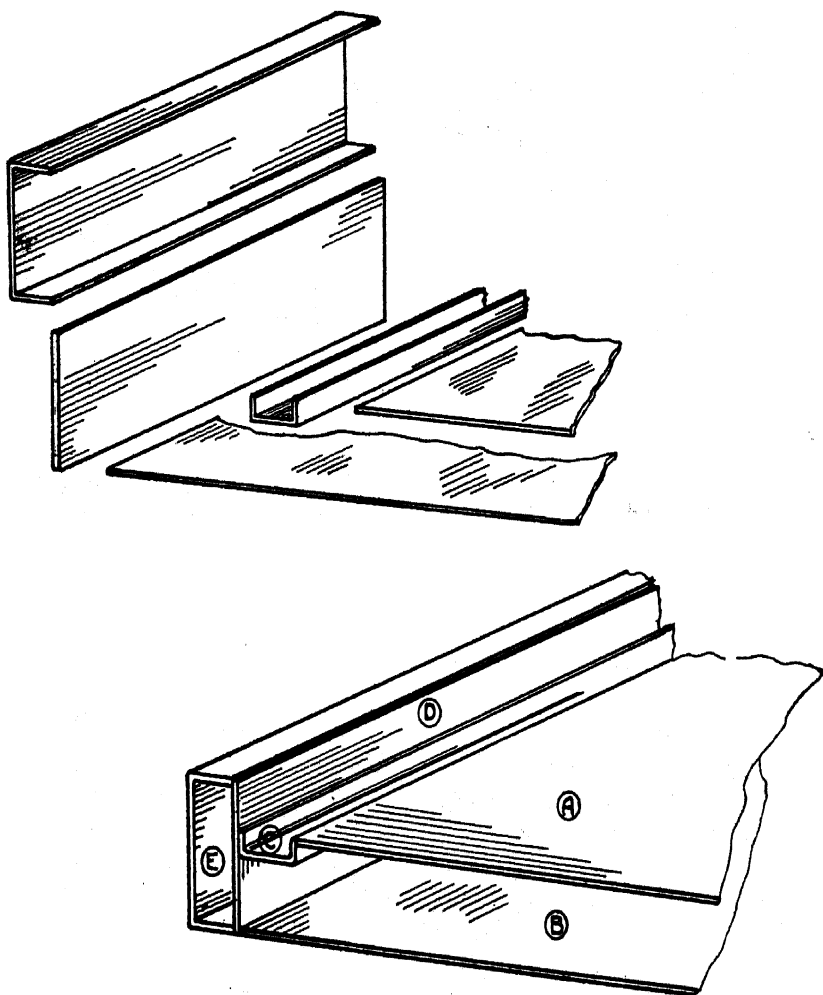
Cross section of a base. (A) is a plate supporting member and top of oil chamber. (B) is the bottom plate of the support and oil chamber. (C) is a channel which forms a drain or trough. (D) is a plate which welded to the channel (E) forms a box section for the side.
